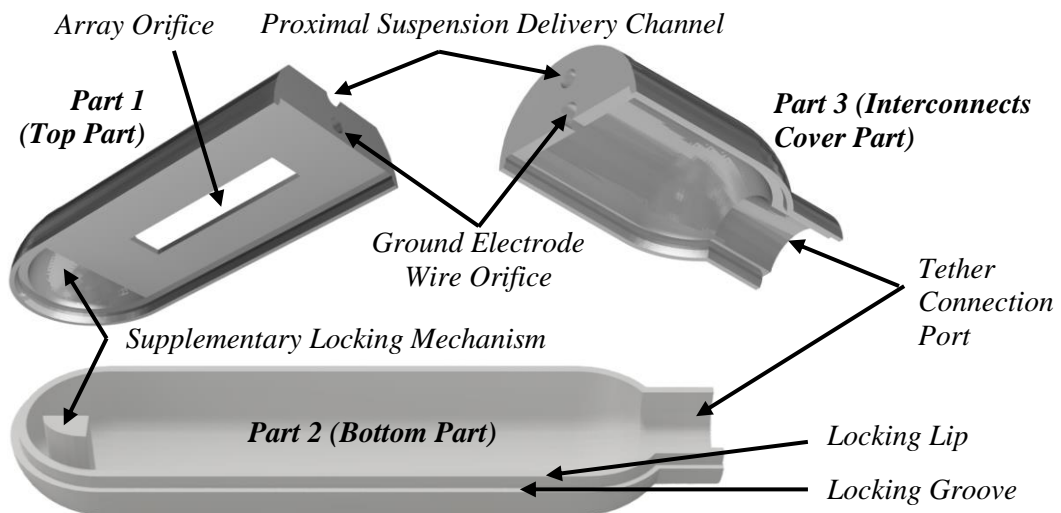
The Three Constitutive Parts of the Capsule Casing
